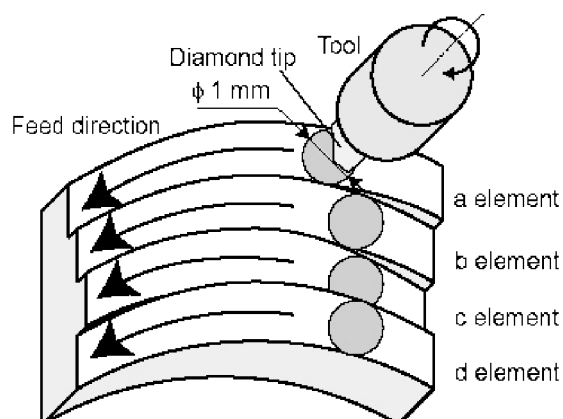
Machining method for a fly-eye mirror using a sphere type tool
